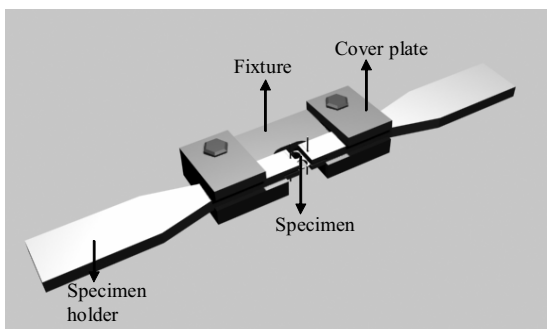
Assembly of fixture attaching specimen holders and the specimen
